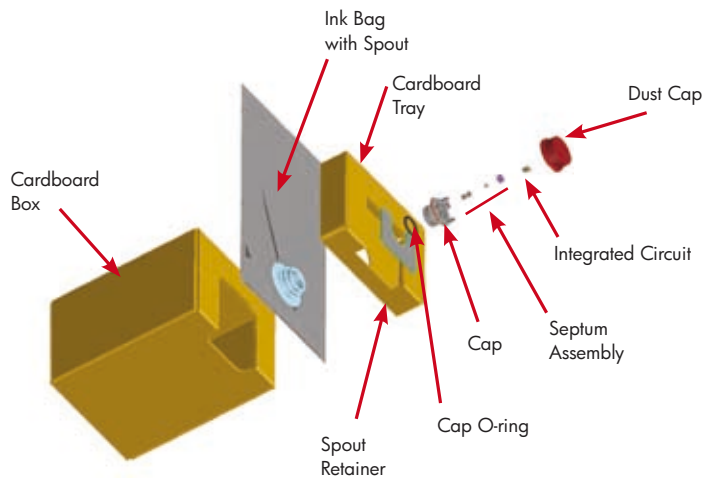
Ink Cartridge – Exploded View Showing Internal Components
